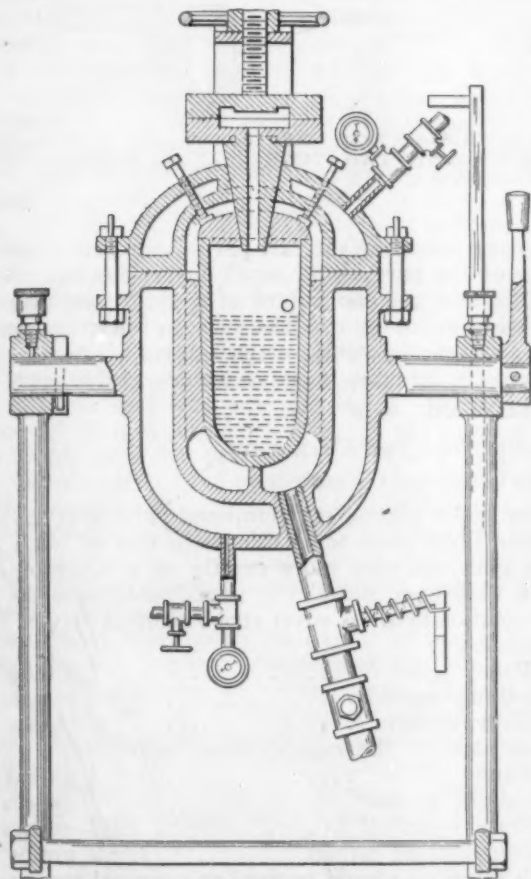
CHANDLER DIE-CASTING MACHINE.
